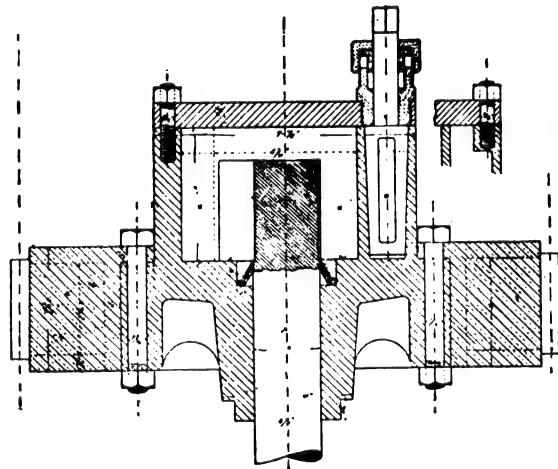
HYDRAULIC CAR GEAR—SECTION.
